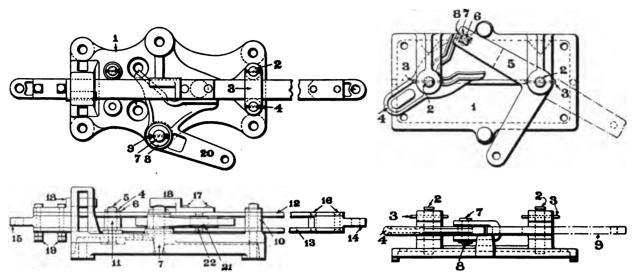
Dwarf Interlocking Machine. The Union Switch & Signal Company.
